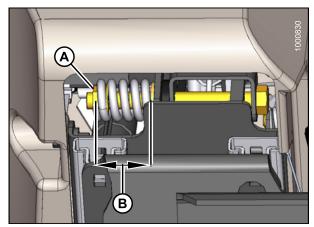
GSL Adjustment Spring B - Spring Dimension 1-1/4 in. (32 mm)
